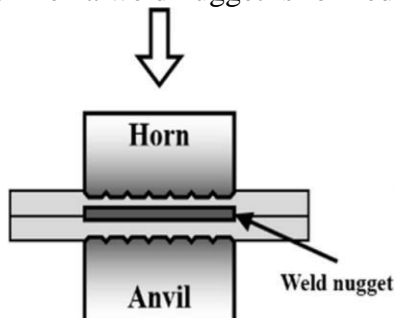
Holding of the ultrasonic welded sheet metals
